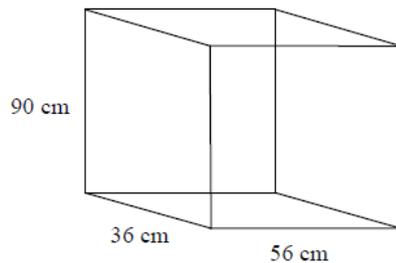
Modelled Inner Space of the Barbecue Machine
